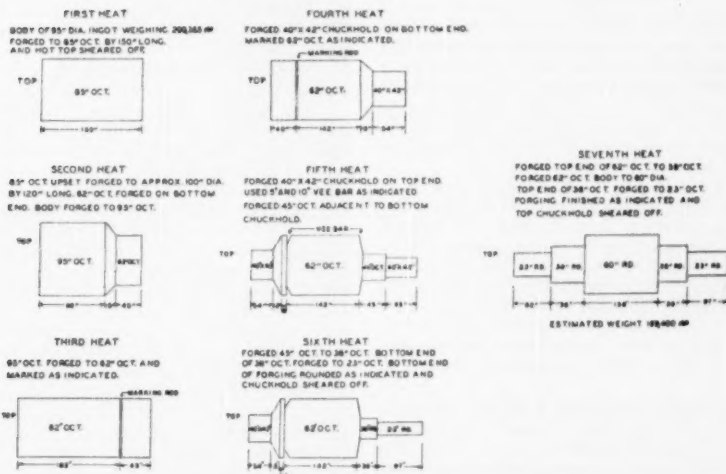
FORGING PROCEDURE FOR A 60-IN.-DIAM GENERATOR-ROTOR FORGING
